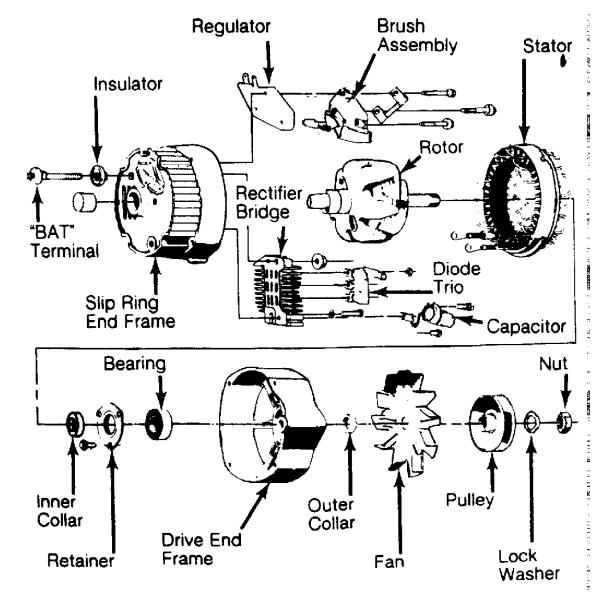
Exploded View of Model 12SI Alternator Courtesy of General Motors Corp.
